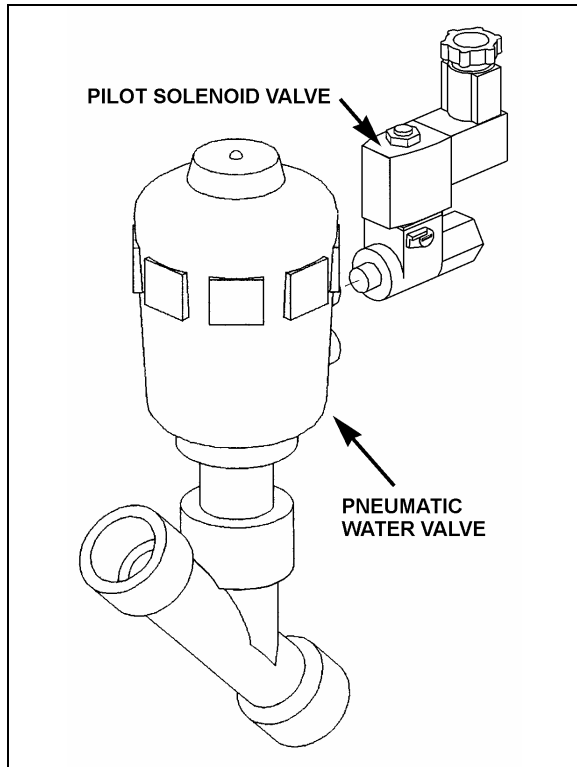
CENTRAL HOT WATER PNEUMATIC VALVE ASSEMBLY
